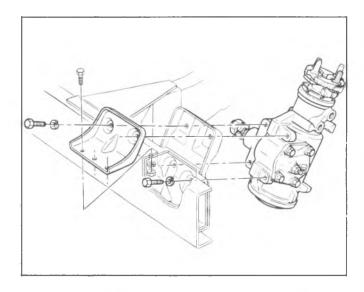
B-49--Steering Gear Mounting-Motor Home-Typical
